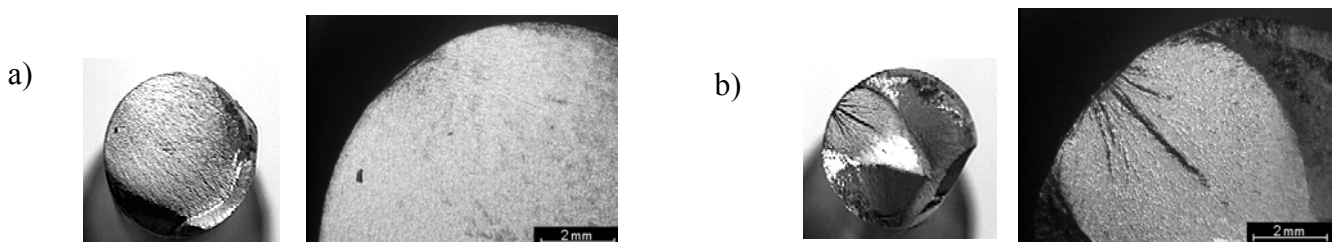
Macroscopic appearance of fracture surfaces. $\Delta\sigma = 1060$ MPa. a) without torsion; b) with torsion.
